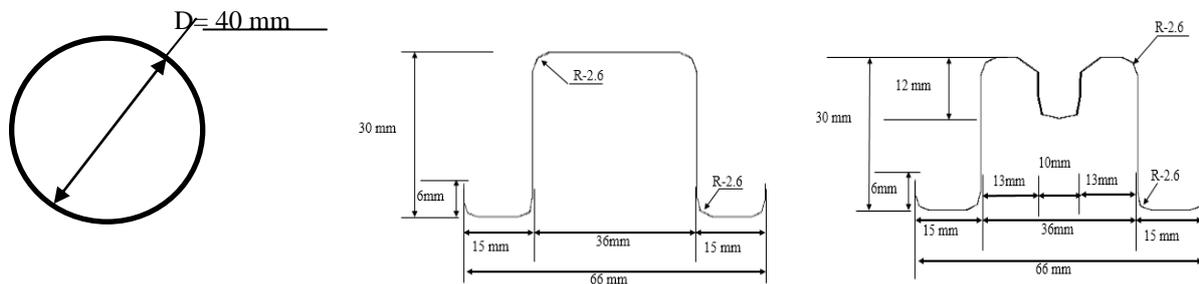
Circular, HAT-section & M-section of the Door Beam in Proposed Work
